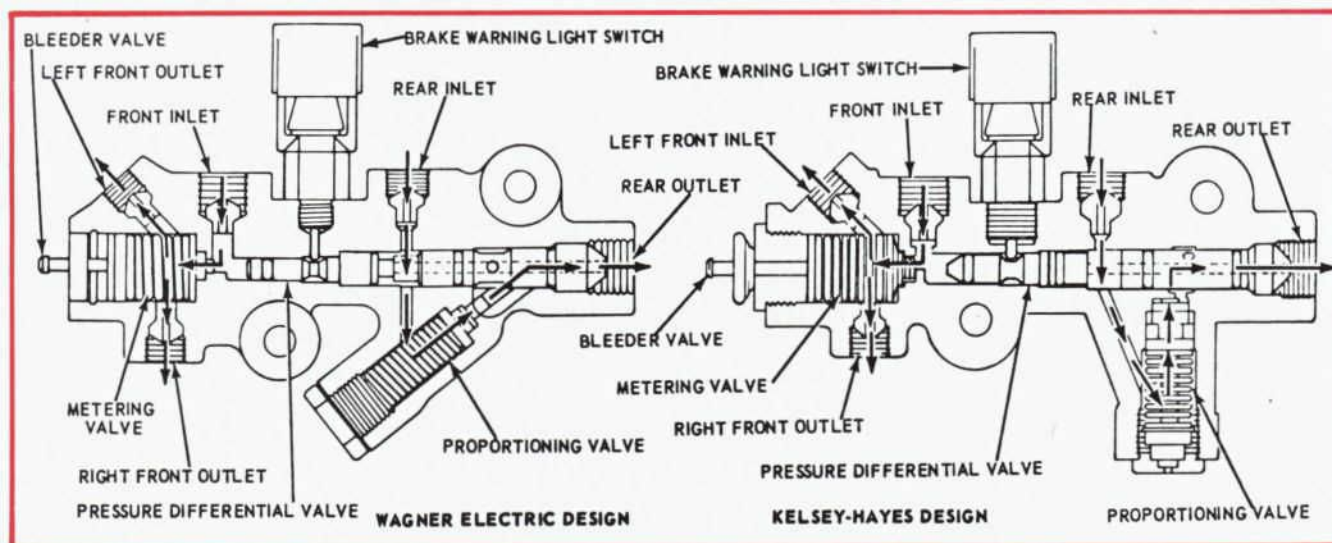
The new brake control valve assembly combines the metering valve . . . the pressure differential valve . . . and the proportioning valve in a single cast iron housing.
